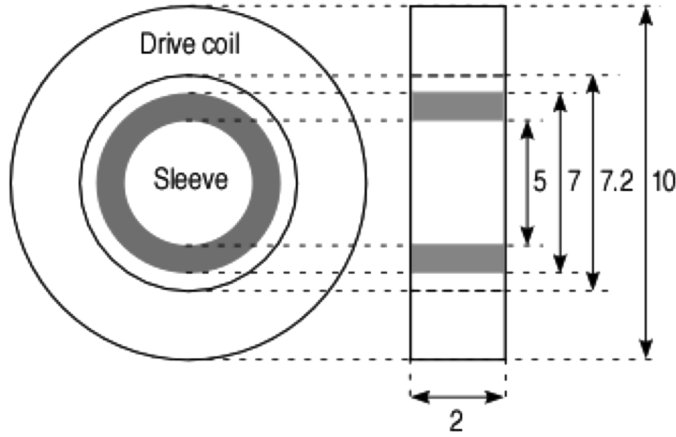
Dimensions (in centimeters) of drive-coil and sleeve.
